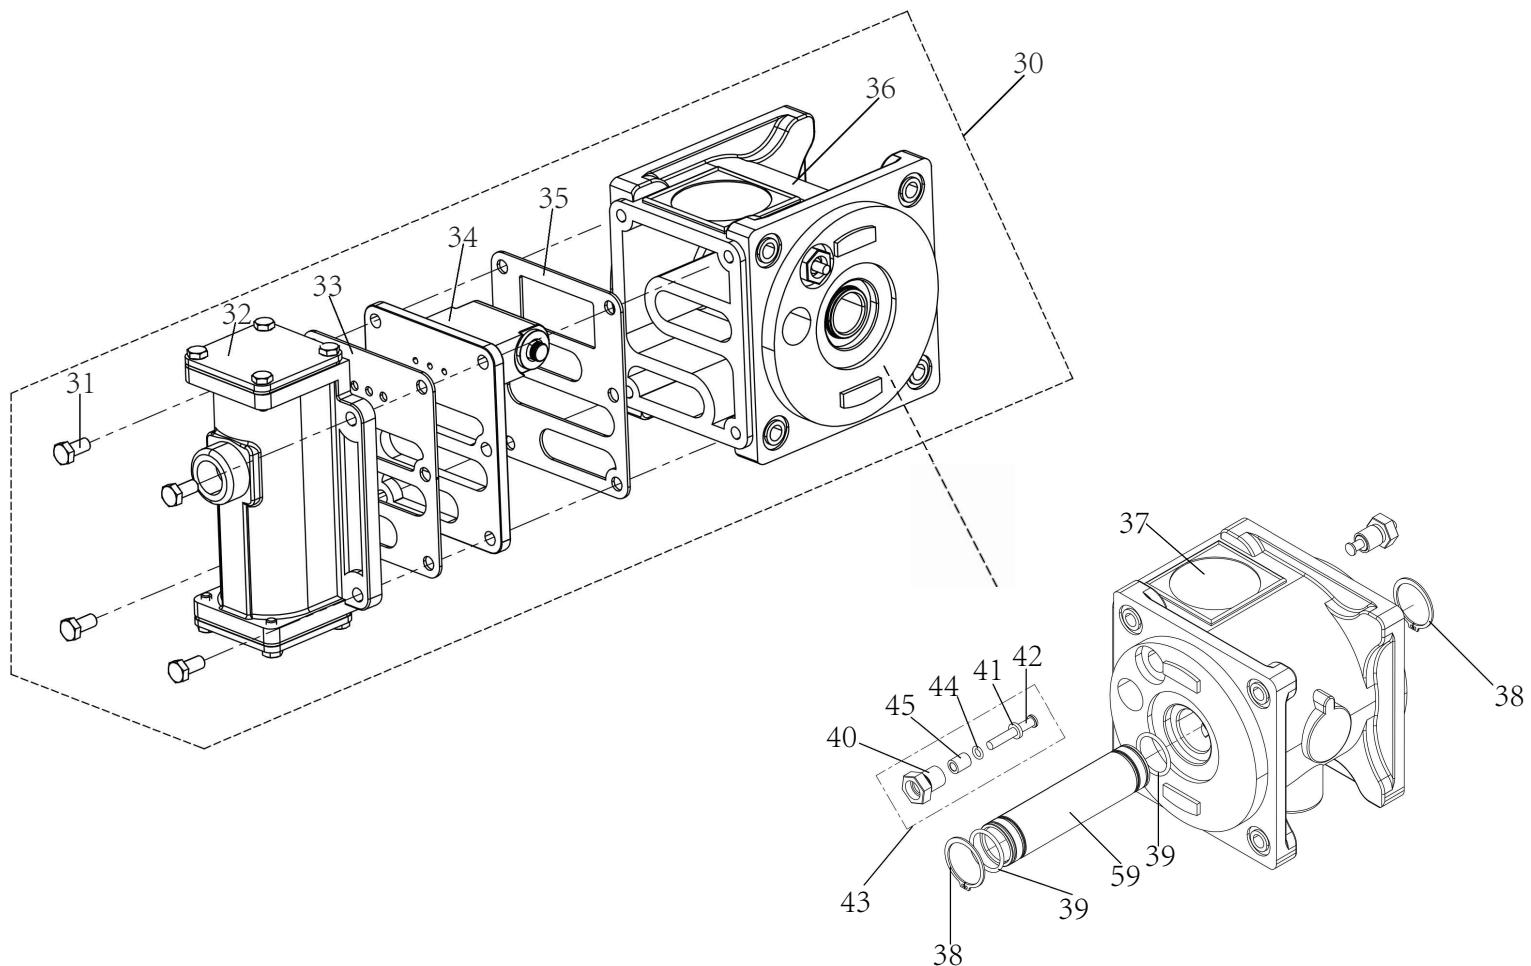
Center intermediate Exploded ViewCenter intermediate Parts List 中间体零件图
